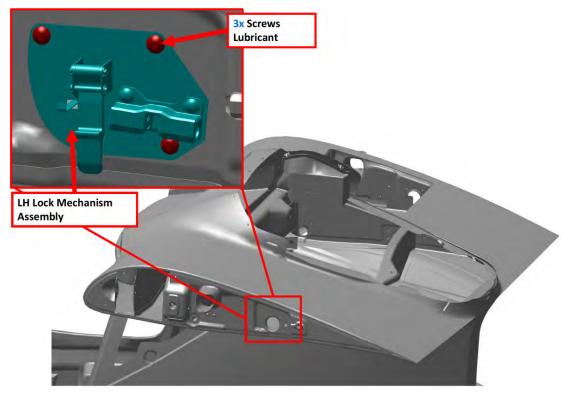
REMOVE WING LOCK SWITCH PLATE
